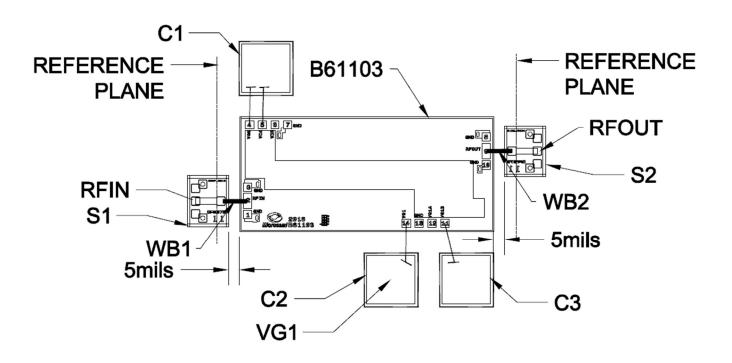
Test Circuits DC-26 GHz: Assembly Drawing
